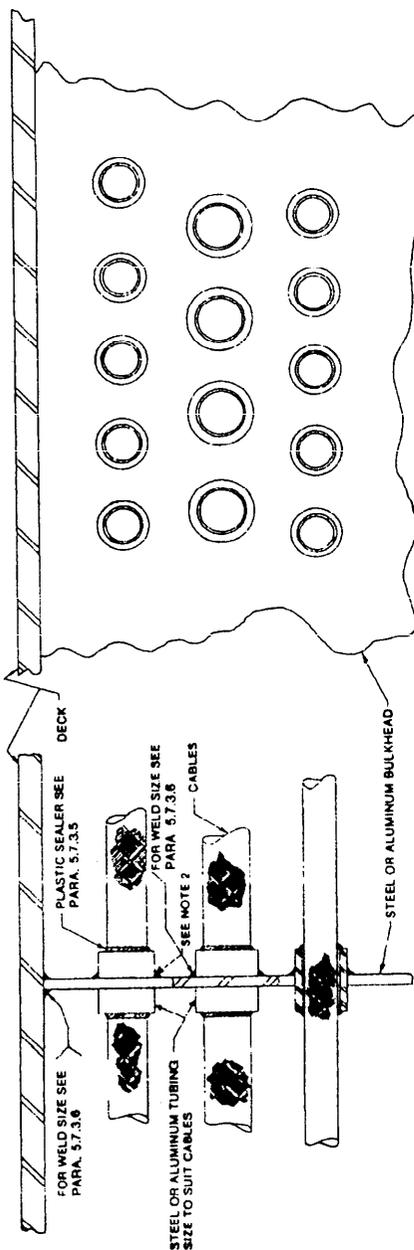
C9. Cableway through non-waterlight bulkheads & beams without firestops.
